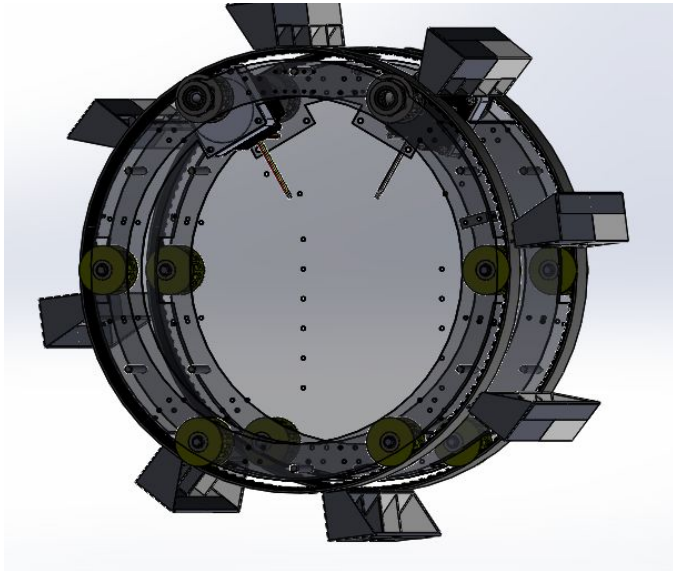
components of a planetary gear. The yellow pulleys are the planet gears and the gray ring is the ring gear.
